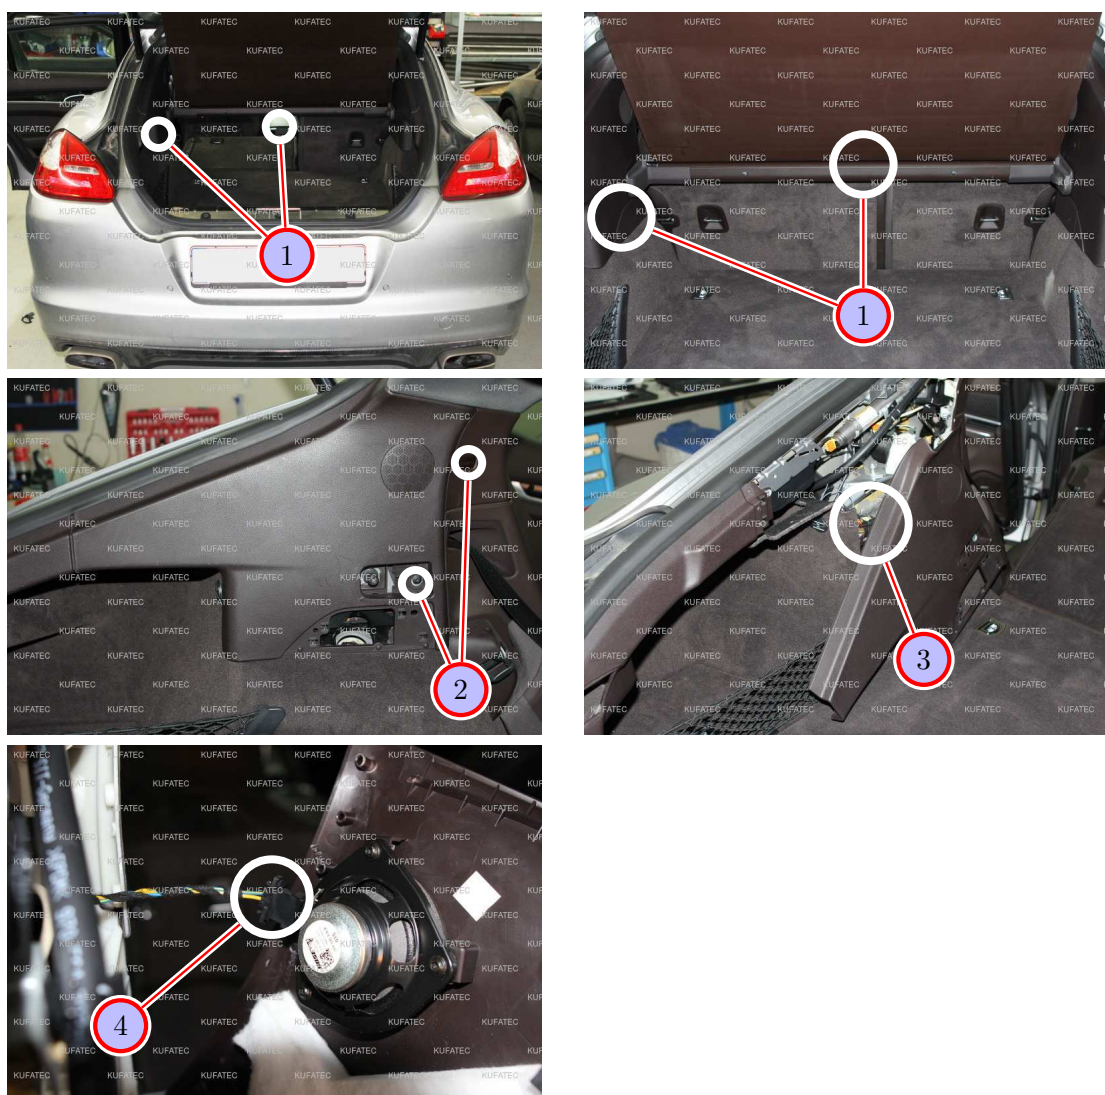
Pictures Removal of the Side Cladding in Luggage Space
